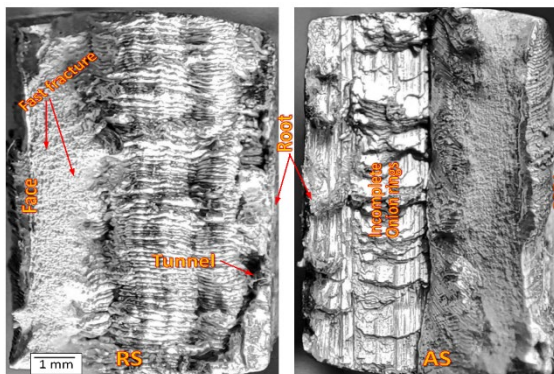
Macrography of the fracture surface for the tensile test specimens of the AA2024-T4 butt joints processed at various rotation speed values and a 25 mm/min travel speed
